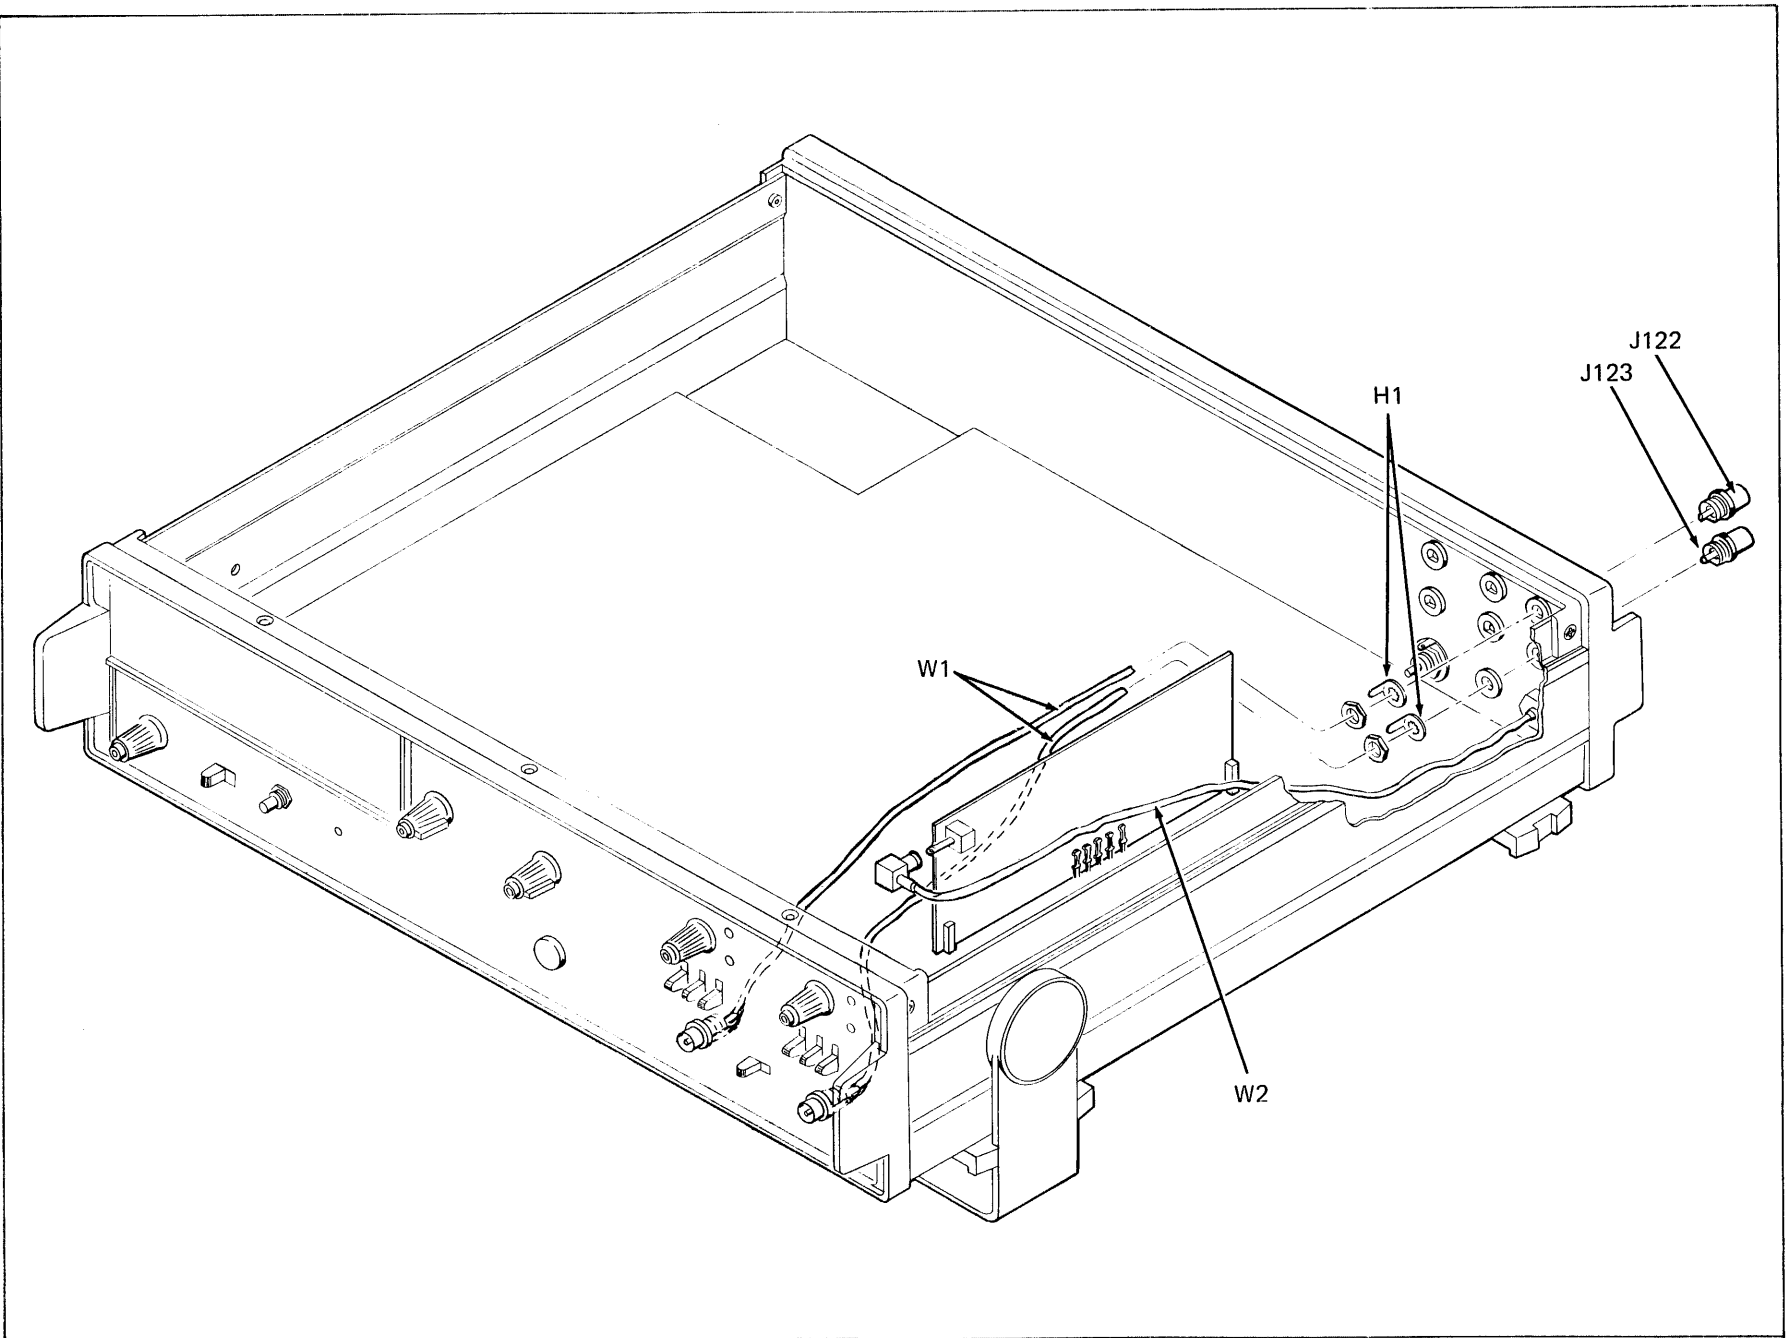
16 Option, Rear Panel Inputs Assembly
